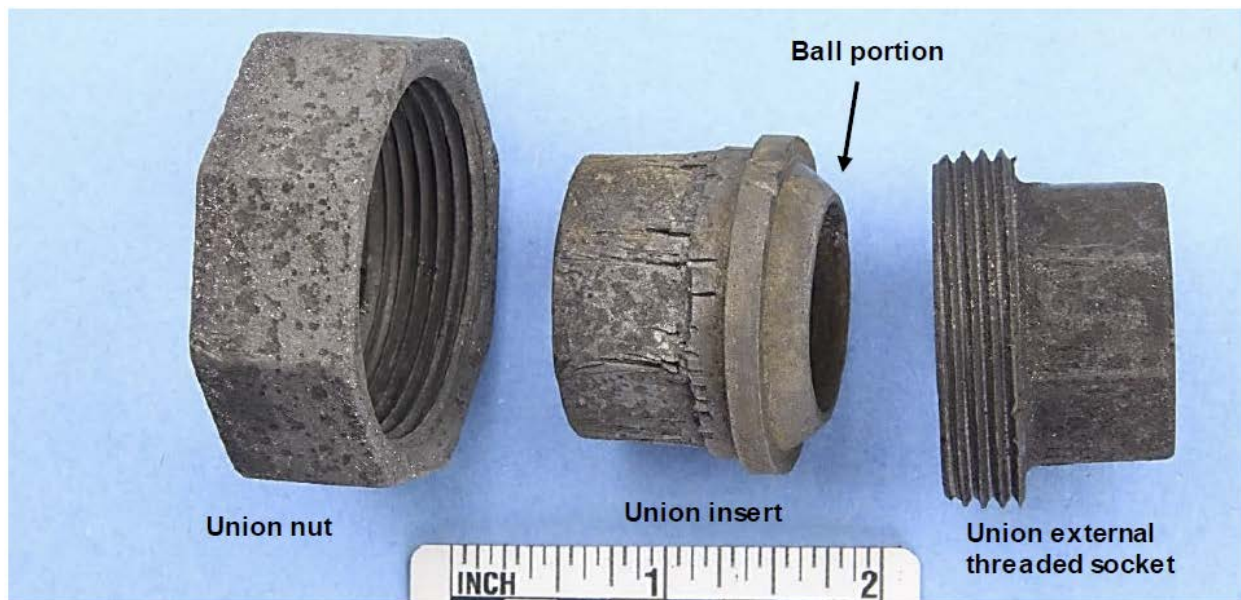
Photograph of the disassembled union assembly for the accident lower gas regulator after cleaning.
